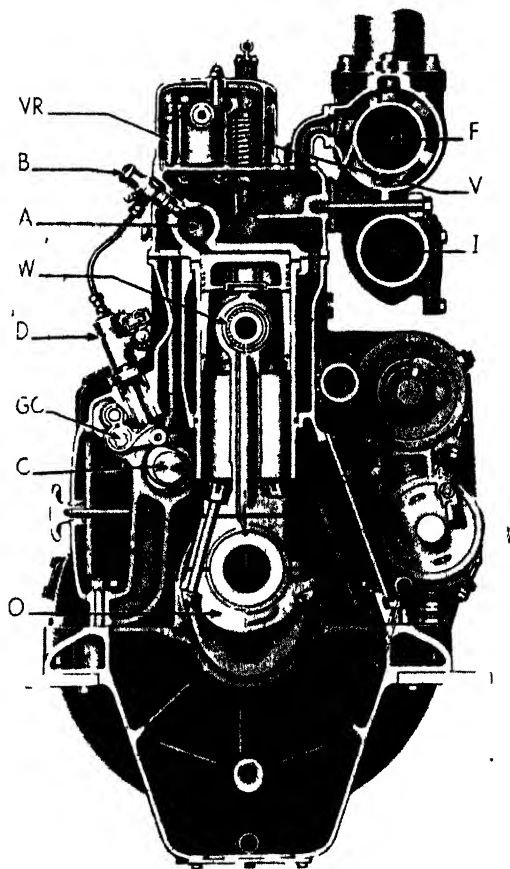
Fairbanks-Morse high-speed Diesel. *A* = turbulence chamber; *B* = spray nozzle; *C* = camshaft; *D* = fuel-injection pump; *GC* = governor control; *F* = exhaust header; *VR* = valve pushrod; *I* = air intake; *V* = intake valve; *W* = piston pin; *O* = crankpin bearing.
